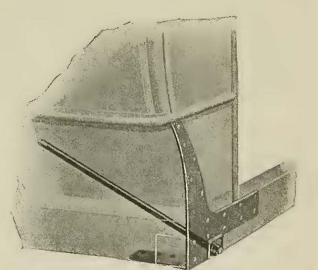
DETAILS OF CORNER, SHOWING SILLS, TRUSS ROD AND CORNER PLATE
